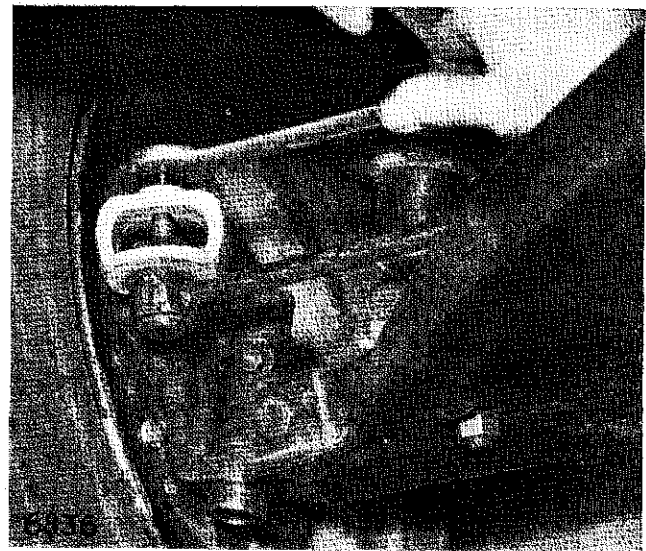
The track rod being removed with special tool RG.284, after the ball pin nut has been removed
